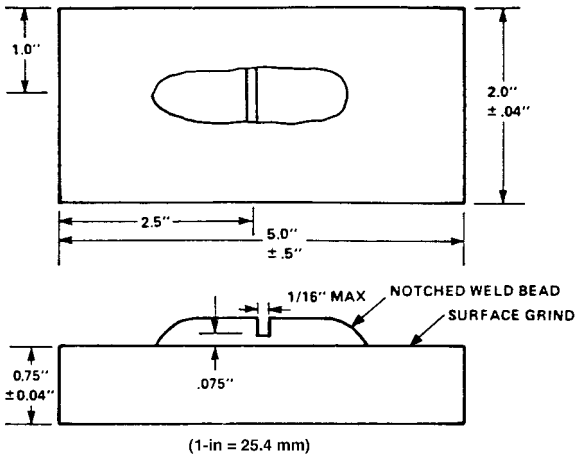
Drop-weight test specimen with brittle weld deposit on specimen face; machined notch to act as crack starter. Impact load applied from side opposite weld deposit. (ASTM Specification E208.)
